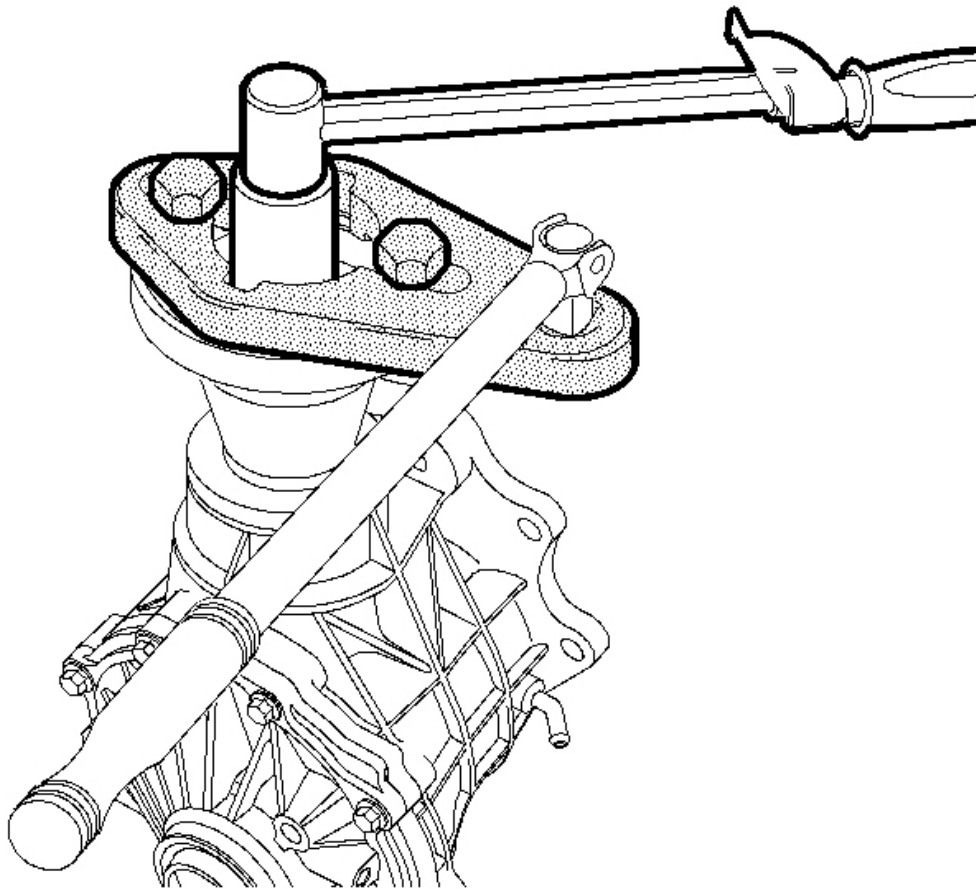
Installing J44873 & 2 Bolts In Order To Hold The Pinion Flange
